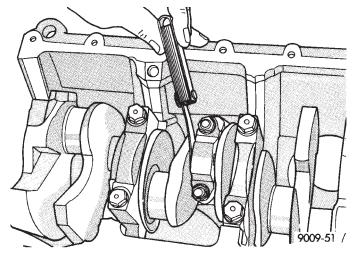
Checking Connecting Rod Side Clearance— Typical
